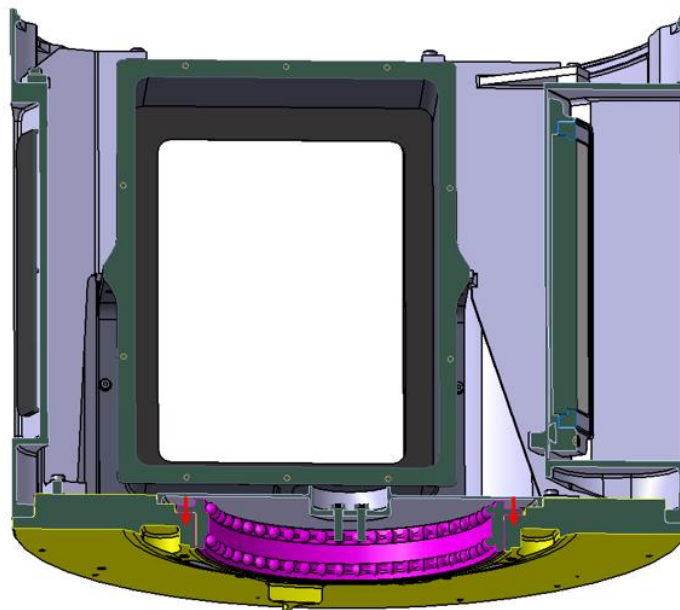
Grounding of Carousel (yellow) and Ball Bearing Assembly (pink)-cut view
